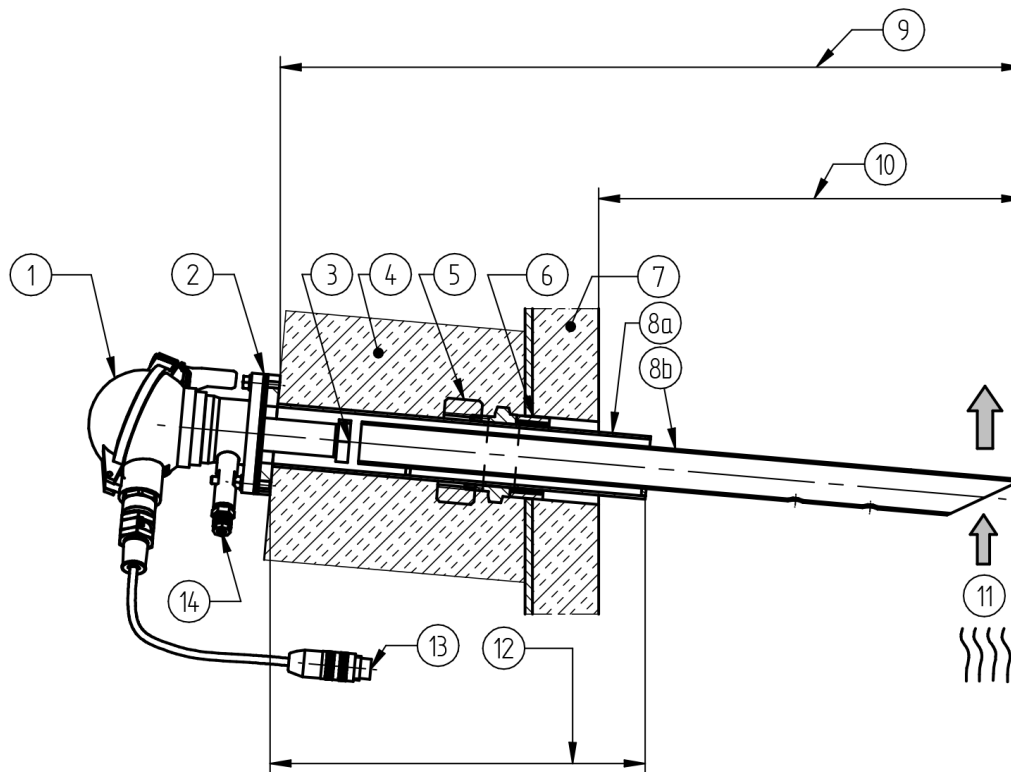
GED FLEX made of Inconel or stainless steel without adapter
